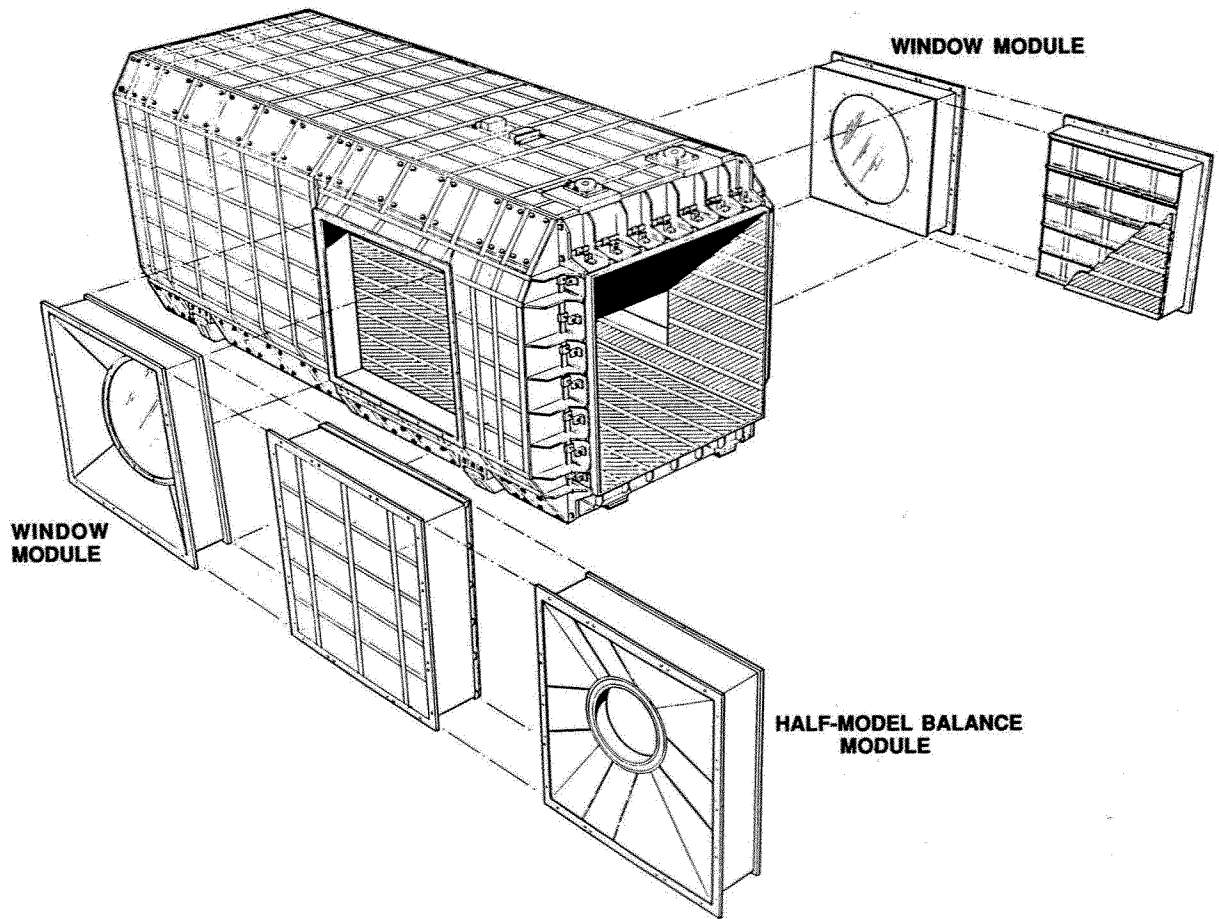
1.5 m x 1.5 m TEST SECTION
